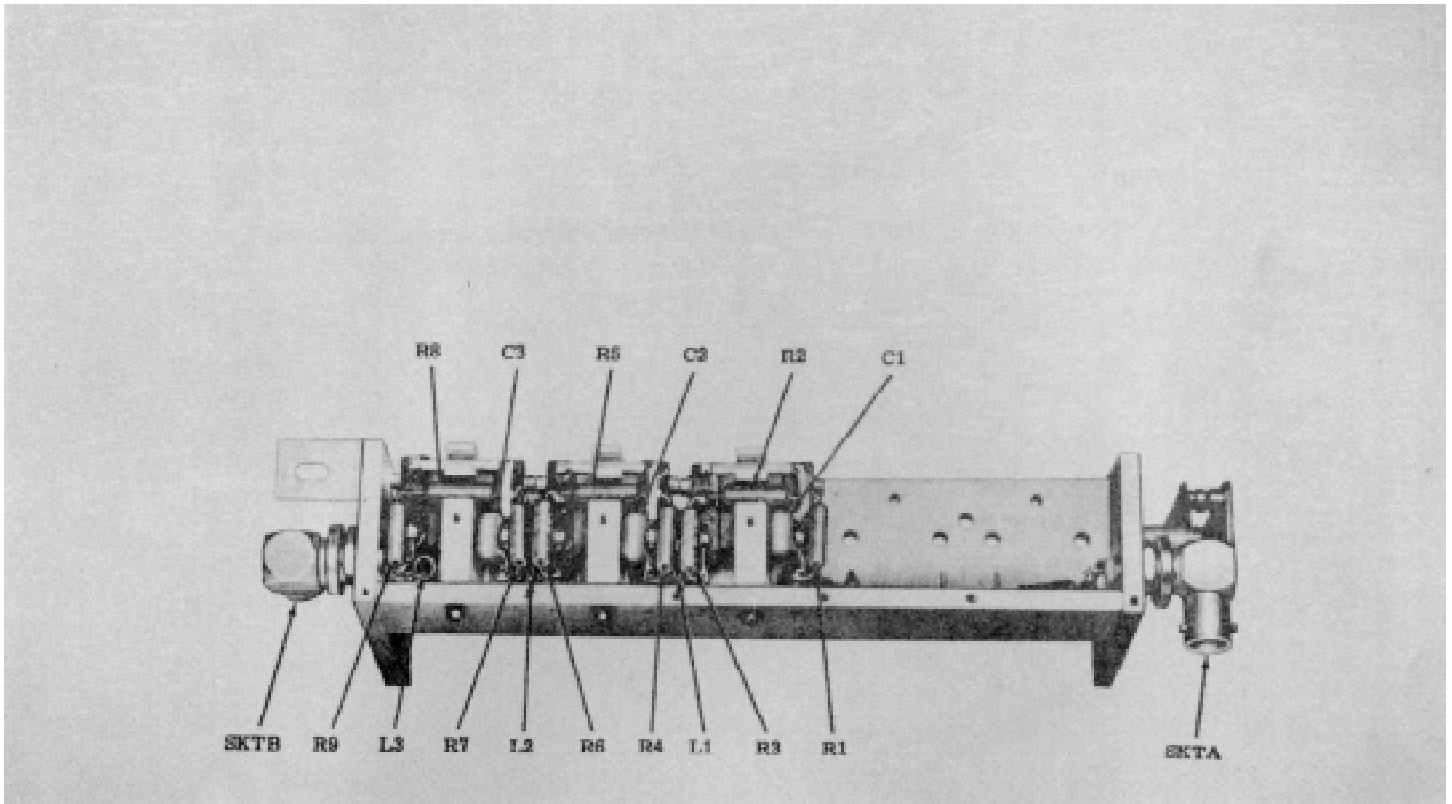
NOISE GENERATOR, COARSE ATTENUATOR TM7787/1, BOTTOM VIEW
